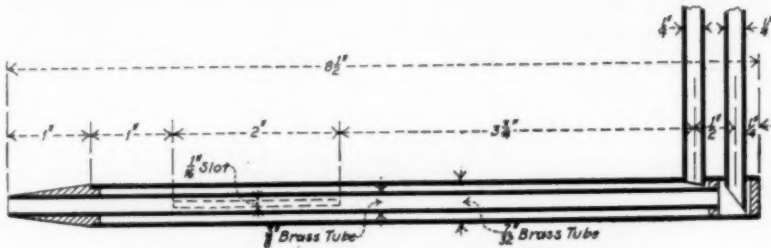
DIMENSIONED SKETCH OF PITOT TUBE X
